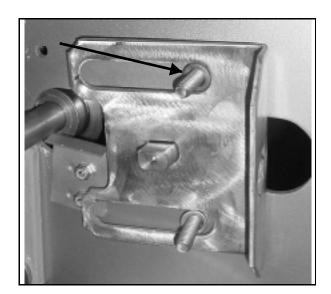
Belt tracking bracket (tension bracket must slide freely underneath)
